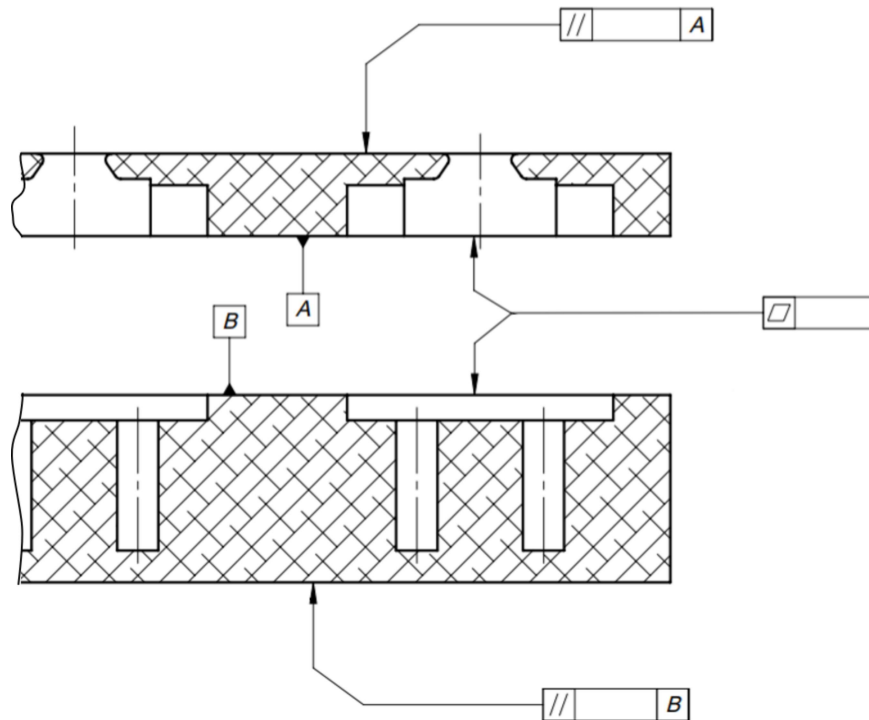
Top and Bottom Component's Mating Surfaces' Geometric Tolerances Representation
